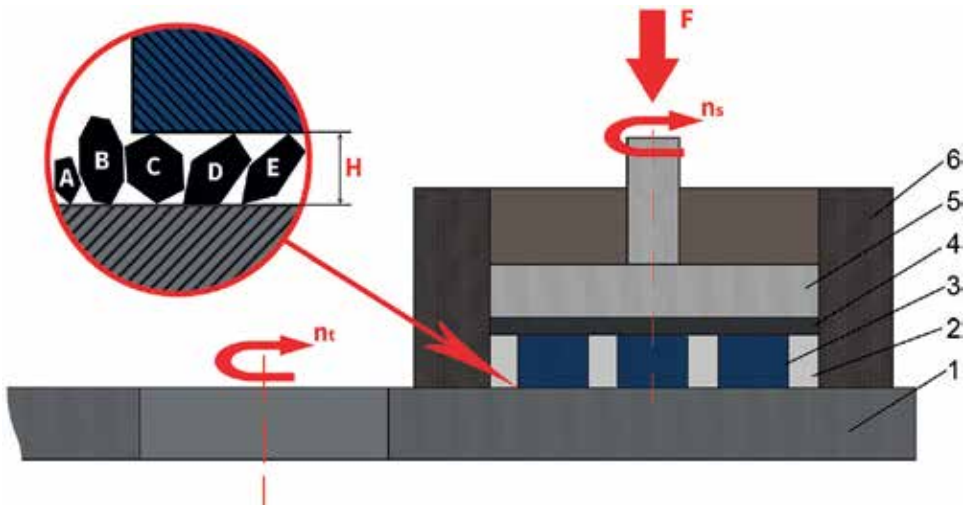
Single-sided lapping process: (1) lapping plate, (2) separator, (3) workpiece, (4) felt pad, (5) weight system, (6) conditioning ring.
